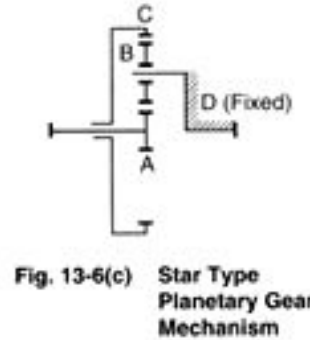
(c) Star Type Planetary Gear Mechanism
